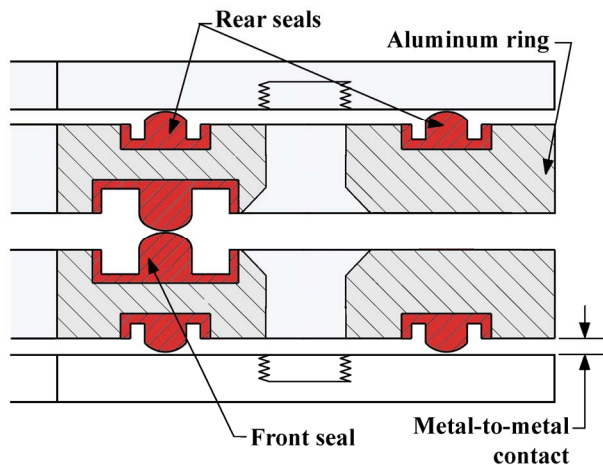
Illustration of the cross-section of 12"CBM test specimens configured in an elastomer seal-on-elastomer seal assembly.
